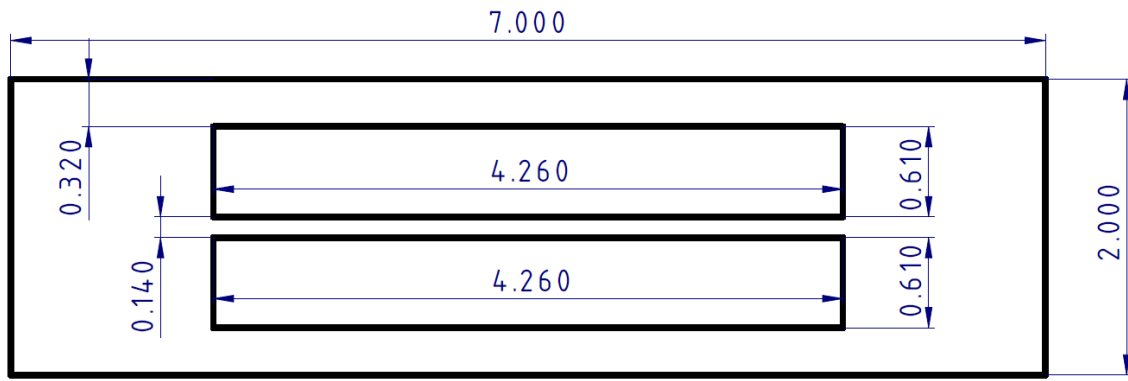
Diagram of the cross-section of plate 3 (dimensions in inches).
